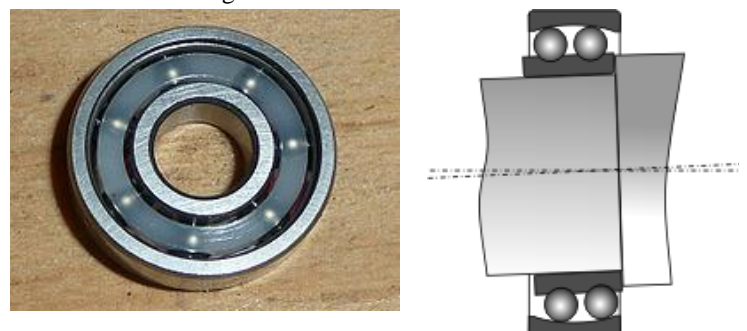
Ball bearing and self-aligning ball bearing
